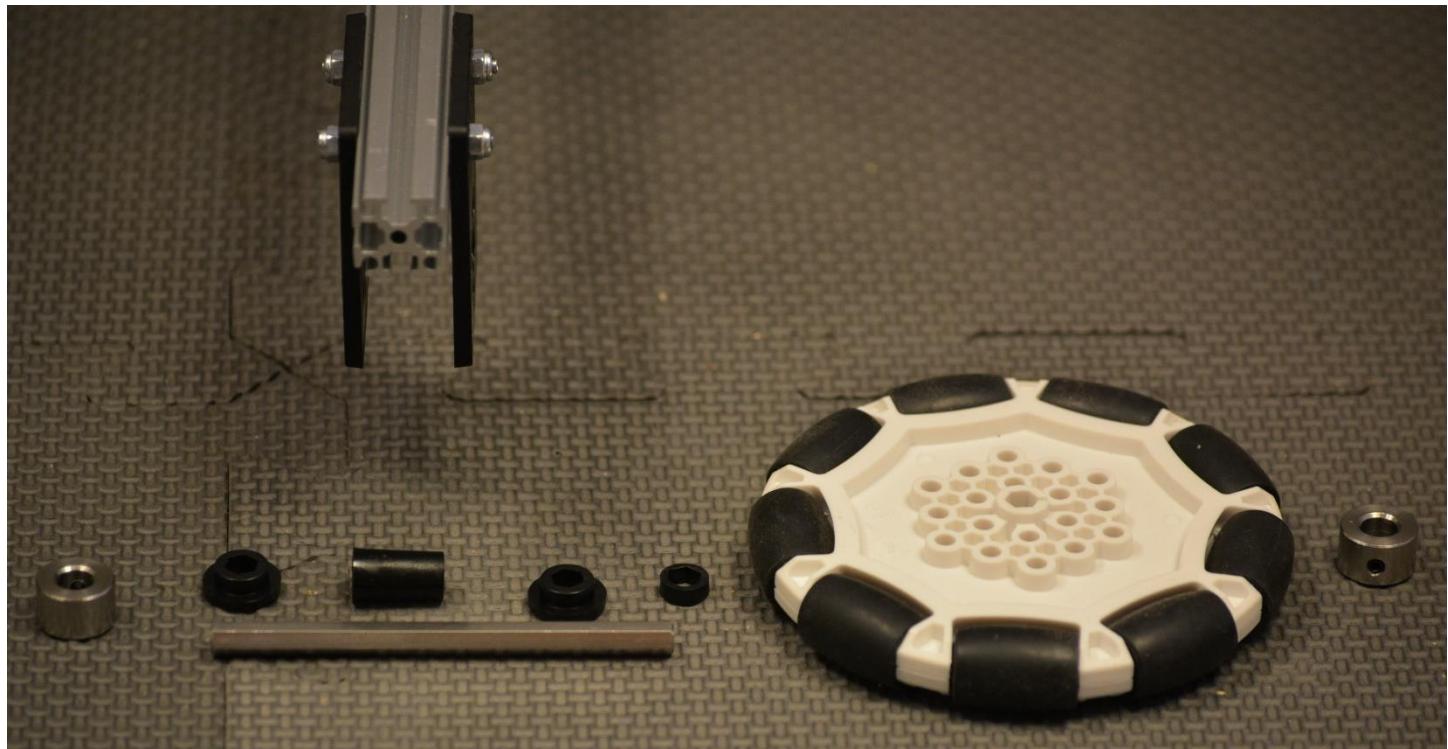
Only the left wheel is shown below. Make a mirror image for the right side.
